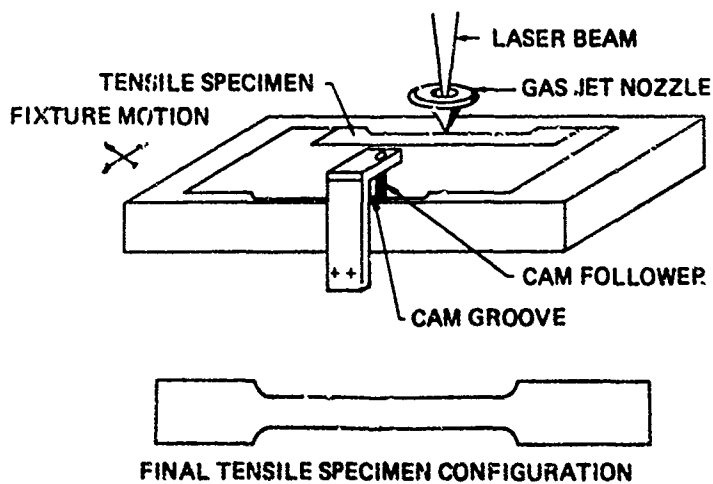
Fixturing for Laser-Cut Tensile Specimens
